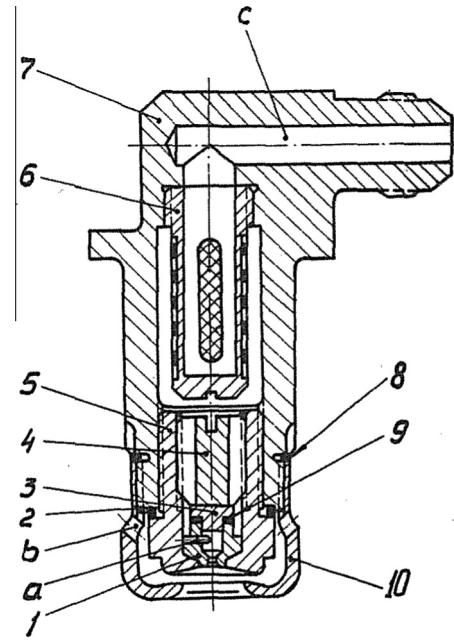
Drawing of the tested pressure-swirl atomizer: 1 – swirl chamber housing, 2 – gasket, 3 – pressure piece, 4 – nozzle screw, 5 – nozzle body, 6 – filter, 7 – housing, 8 – gasket, 9 – gasket, 10 – nozzle cap, a – swirl chamber inlet, b – cooling air inlet, c – fuel inlet. Reproduced from [33].
